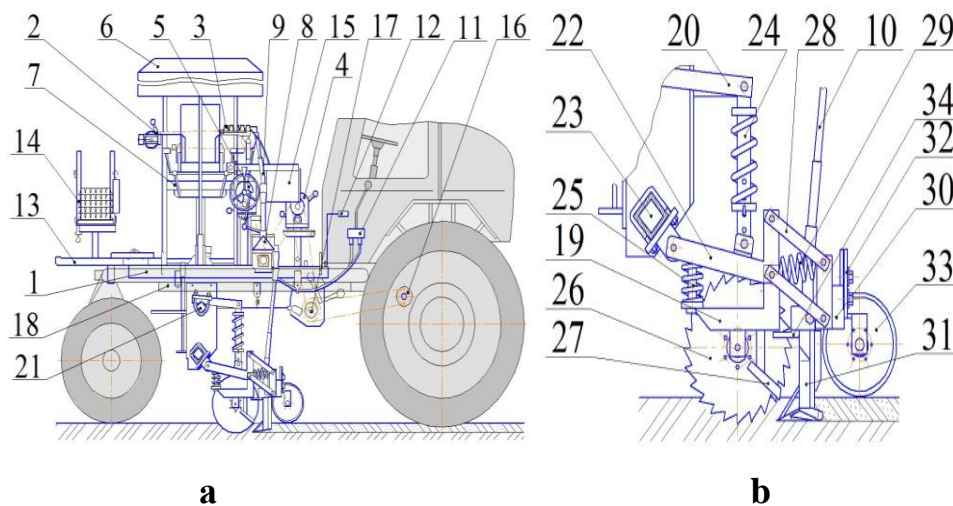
Constructive schemes: a – seeder mounted selection cassette; b – coulter unit with a cogged disc knife and a pointed claw
